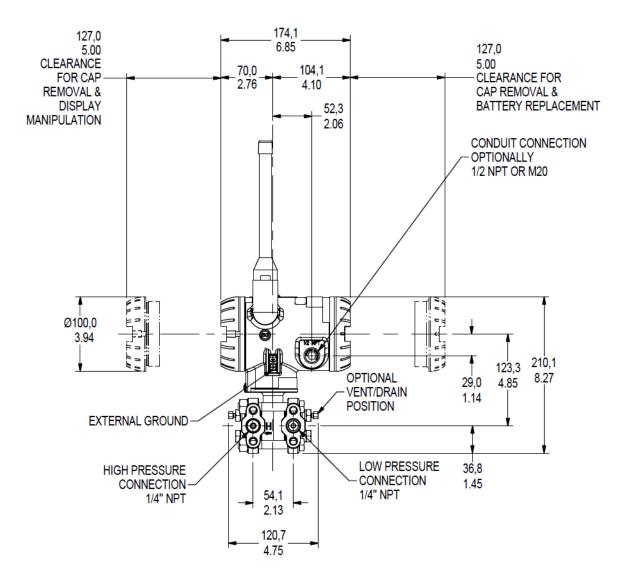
Dual Head Gauge, Informational and dimensional drawing (4 dBi antenna shown)
